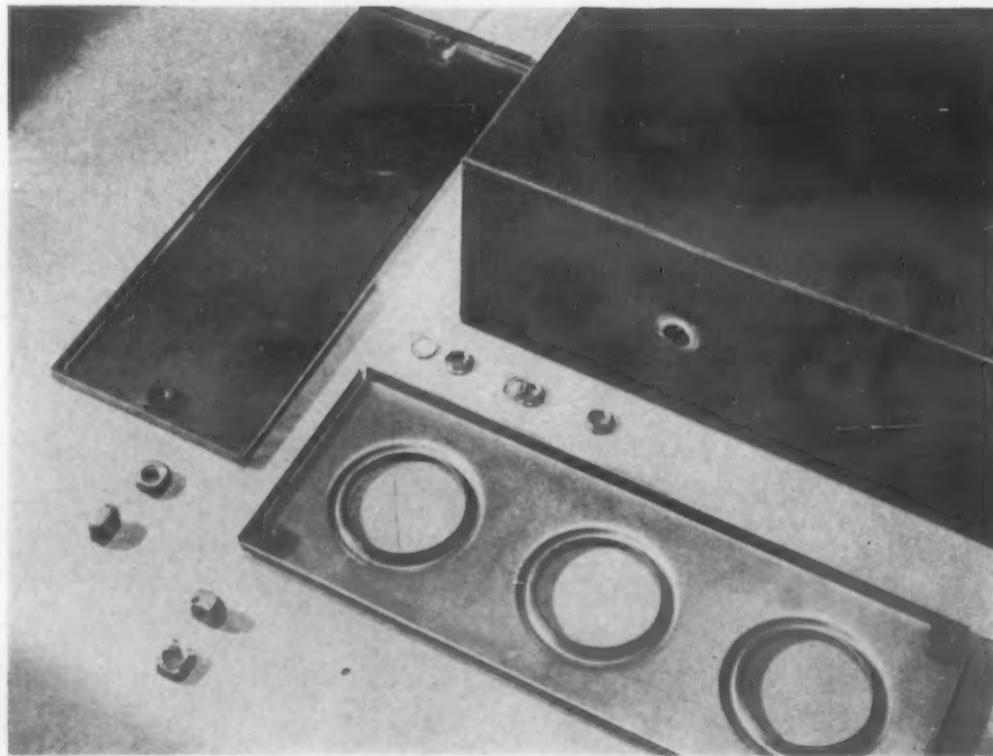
Through the use of two carbon electrodes mounted in a standard press welder, the bushing in the upper box was silver brazed. Power and alloy costs were reduced over gas brazing formerly used.
